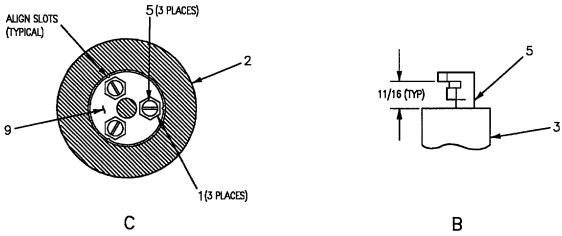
Removal of Pylon Post Bushings (Sheet 2)
